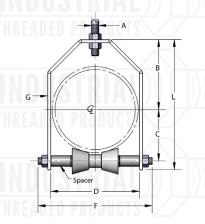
SS ADJUSTABLE ROLLER HANGER, 316 STAINLESS STEEL
